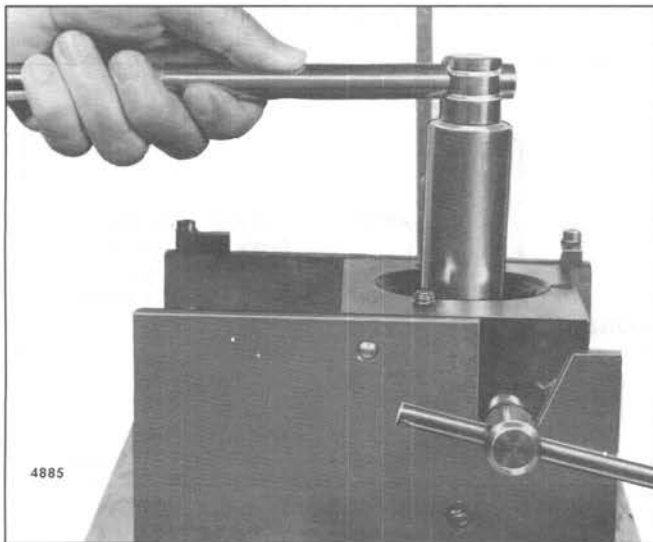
Removing Injector Nut using Tool J 4983-01
